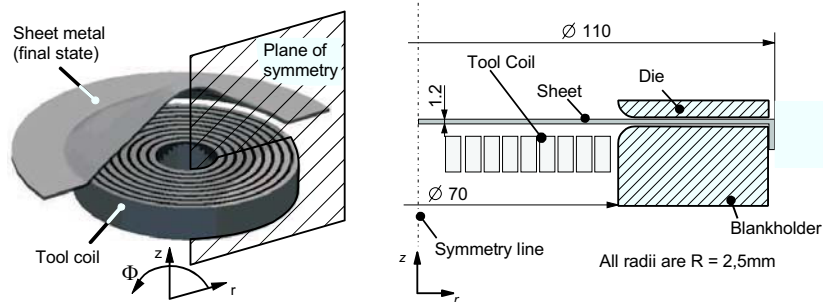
Geometry of work-piece, die and tool coil for the sheet metal case.
